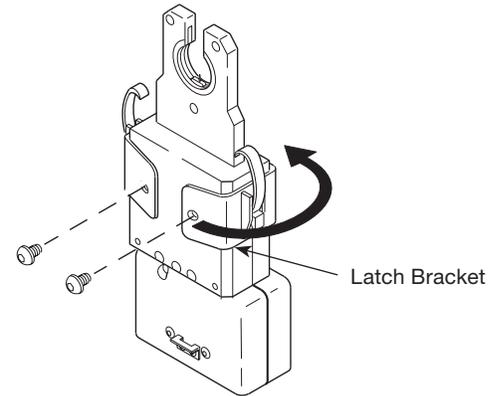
Removing Series 8 Micro Weld Head Latch Bracket
